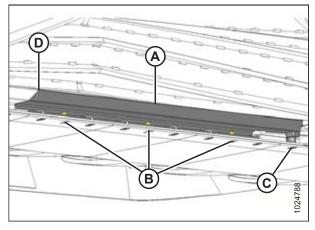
Right Side Cutterbar Deflector Viewed from Underside of Cutterbar
